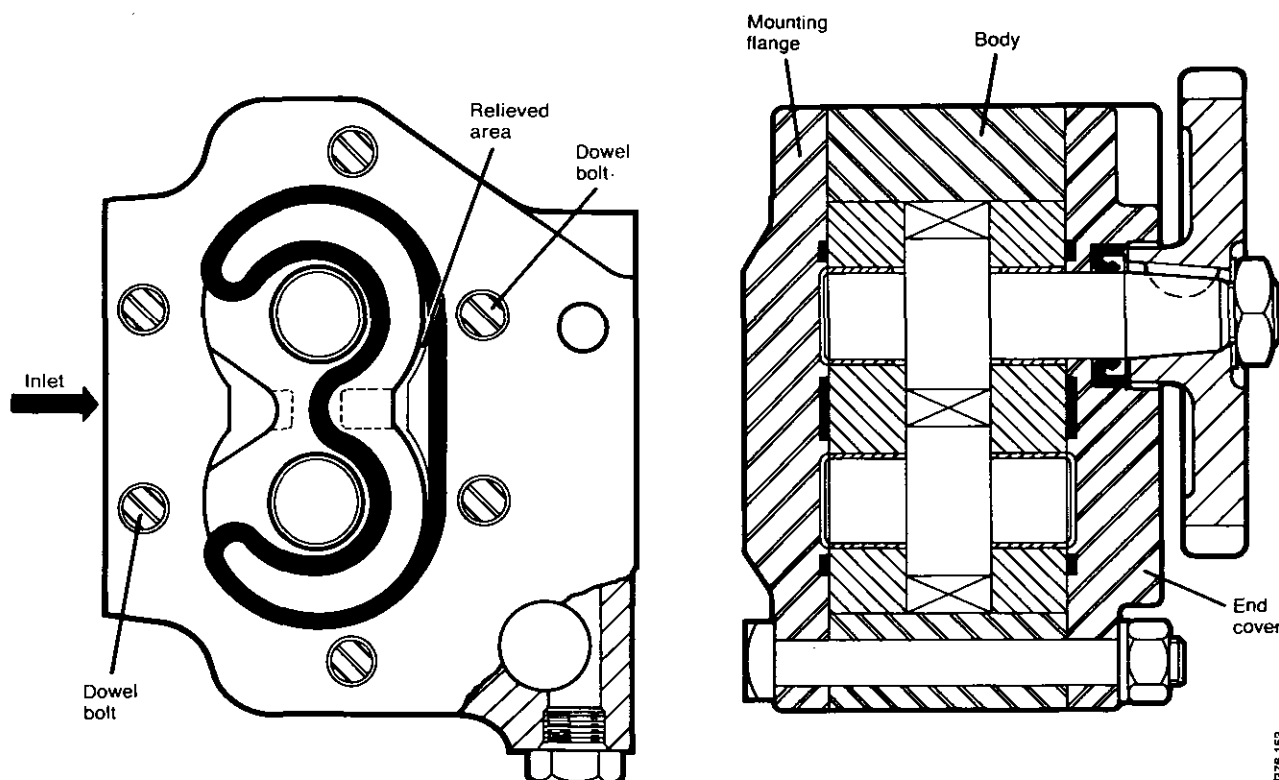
PLESSEY PUMP BEARINGS AND SEALS
